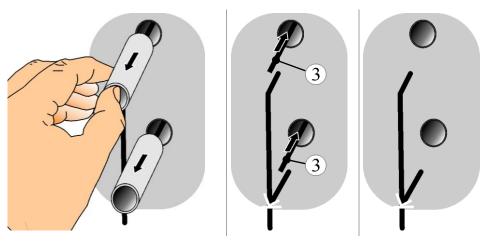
Carefully remove the ceramic feedthrough tube (similar to picture)
